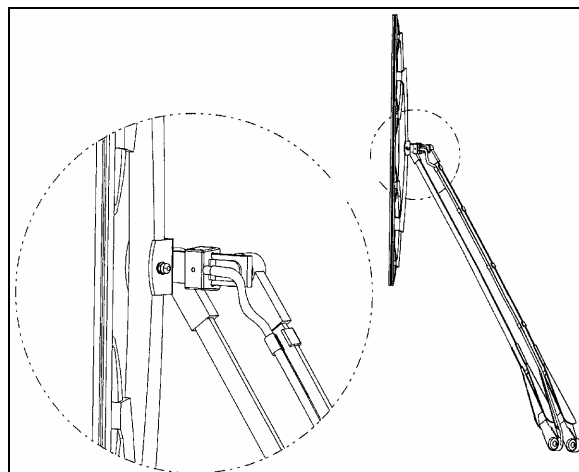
WINDSHIELD WIPER (MOTOR SIDE)
